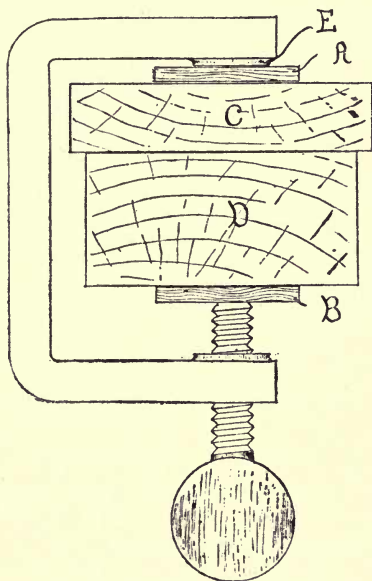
A useful Cast-iron Clamp for holding small glued work.
